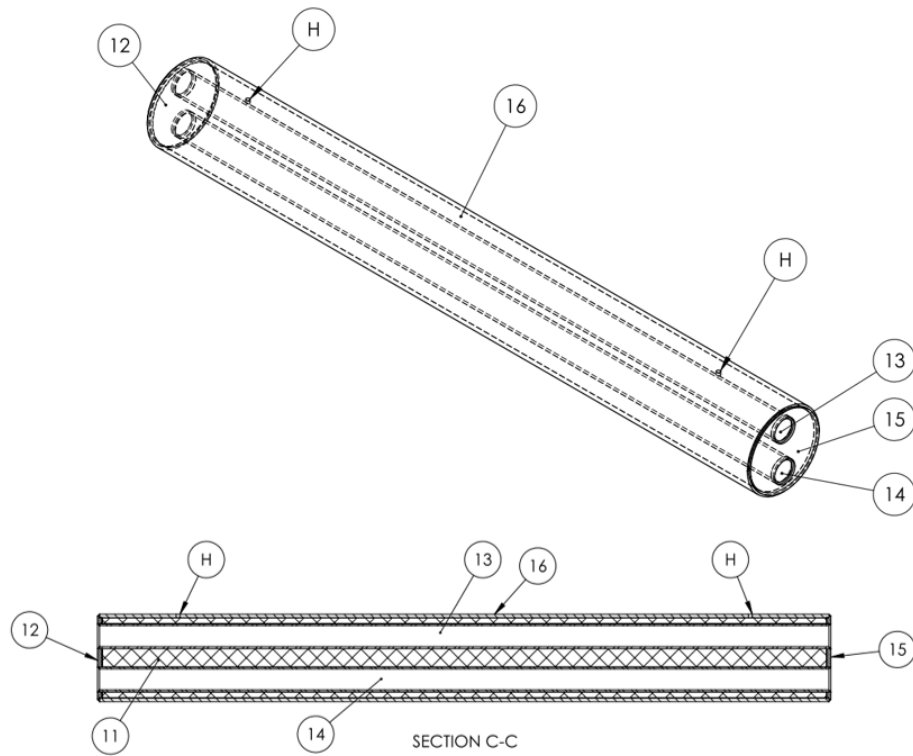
Detailed view of insulating sleeve assembly. Isometric view (top) and side view (bottom). Cross-hatching shows location of insulation.
